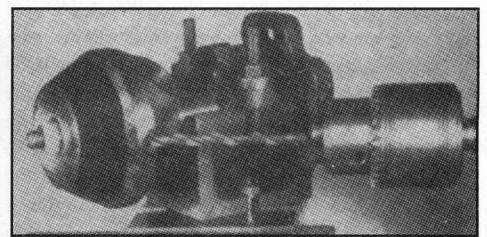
Drilling indexing holes through the 45 deg. position for the four tool holder.
